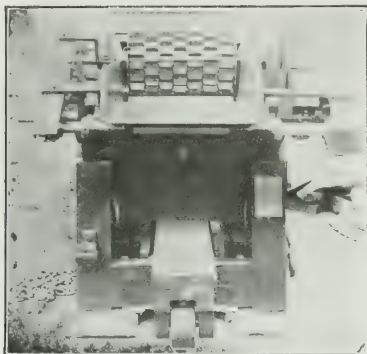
Rag Cutting Machine, with Feeding Mechanism Guarded.
